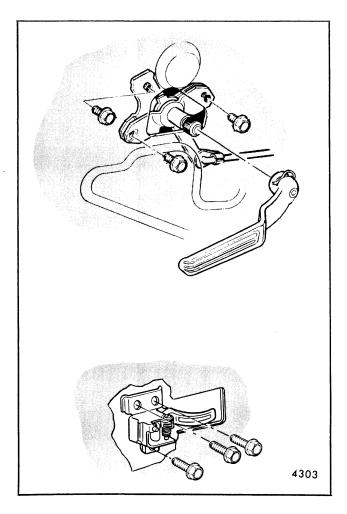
Typical Door Lock Remote Control Handle Installations
